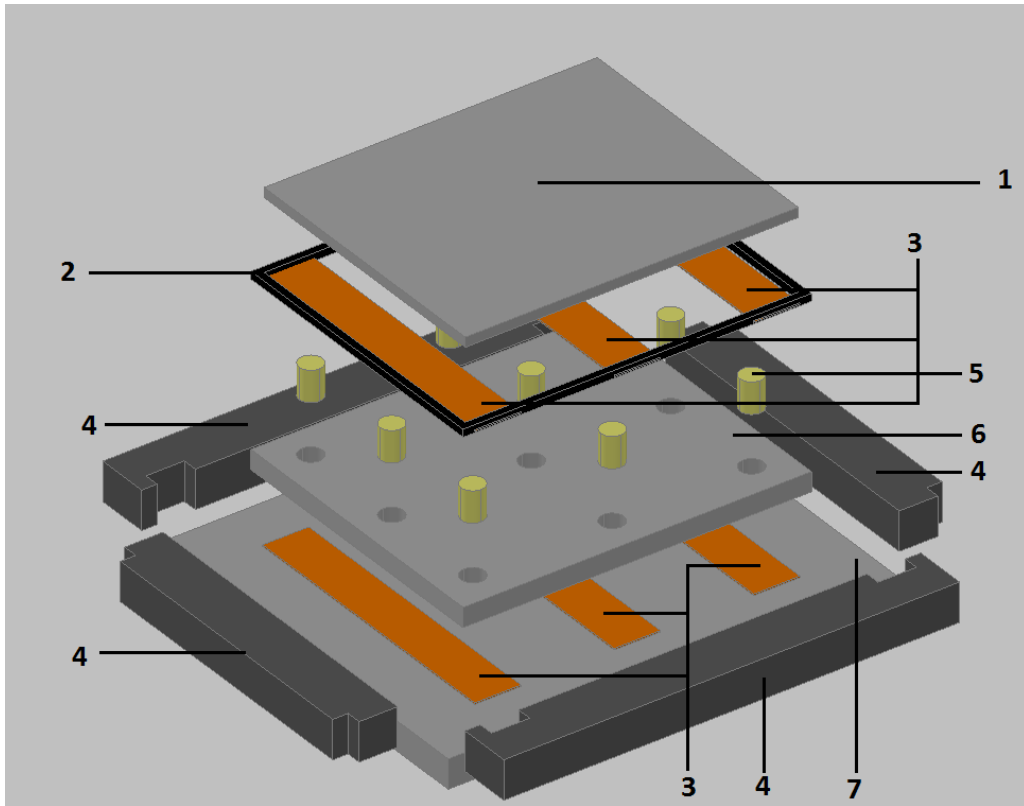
Chart. Three dimensional view of the Assembly Design VI (disassembled).
